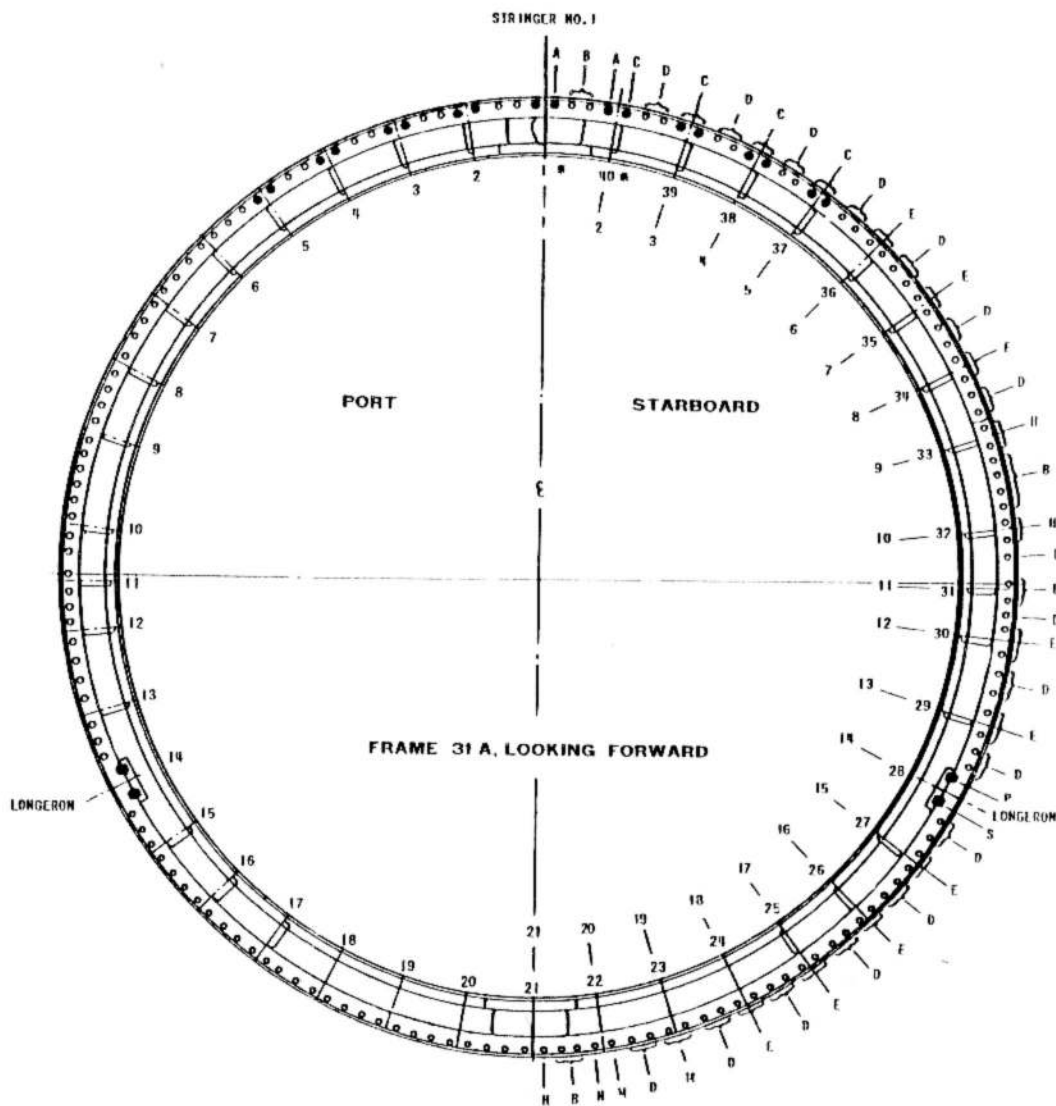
ATTACHMENT BOLT DETAILS - REAR-TO-CENTRE FUSELAGE
